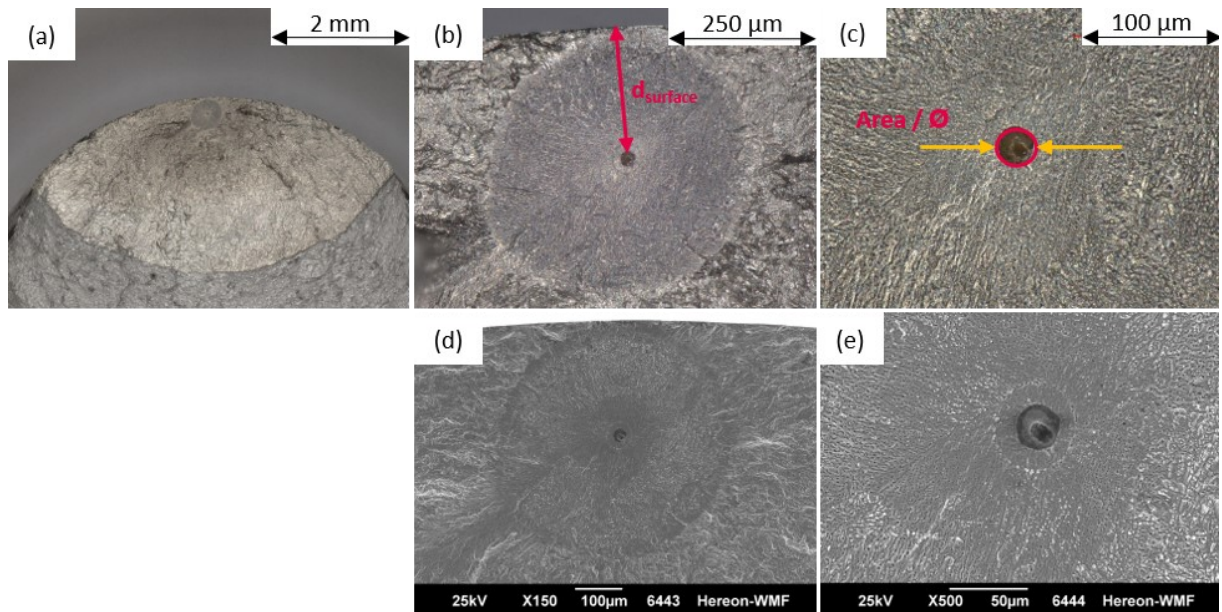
Typical fracture surface of a specimen with an internal defect from a block-like structure manufactured with IPT680°C after fatigue threshold testing showing (a) an overview of the fatigue fracture surface, (b) the region of internal fatigue crack growth and (c) the origin of the fatigue crack. (d) and (e) are SEM-images of the same regions as (b) and (c) respectively. The morphology of the fatigue fracture surface can be discerned more clearly.
